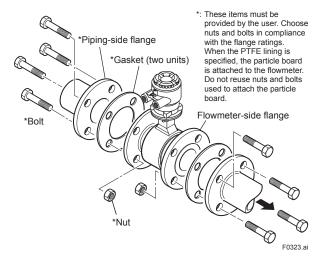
Mounting Procedure for Flange Type (sizes: 25 to 400 mm (1 to 16 in.))
